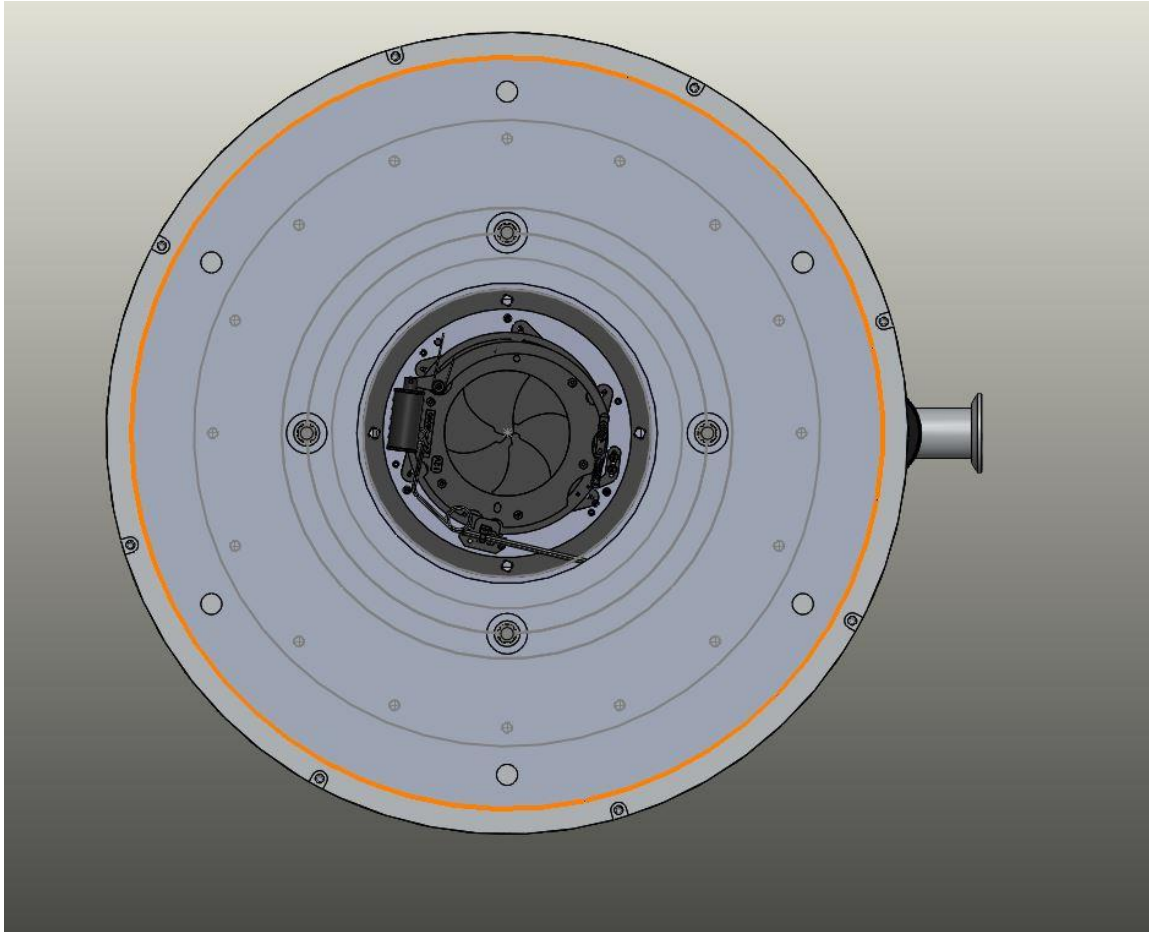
HERESY with Kuiper Telescope Mount (Top View)
